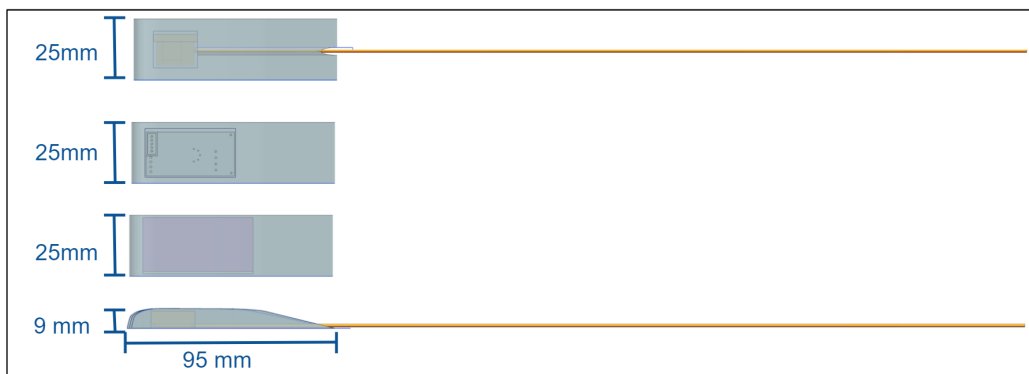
Top view (Top) and side view (Bottom) of airfoil package design with housing for each component.
